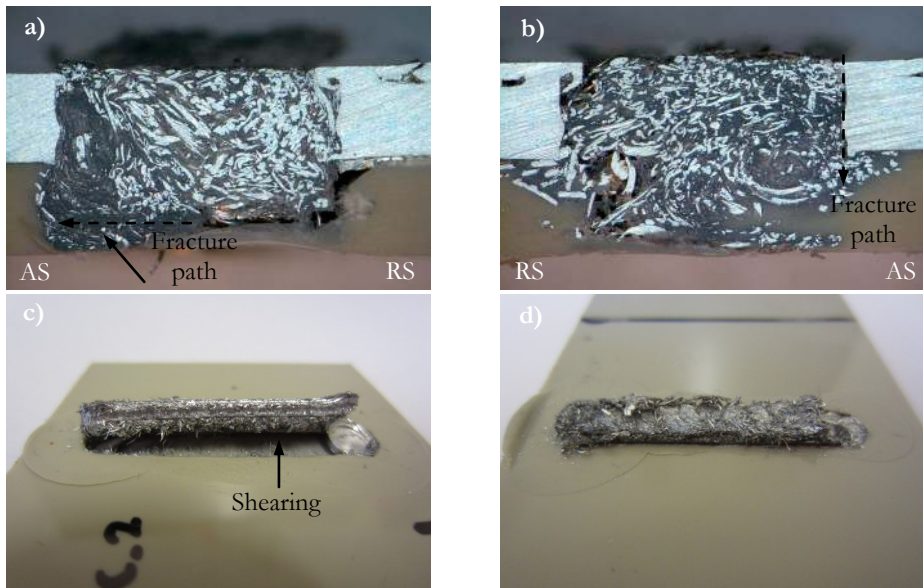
a) AA5754-PP joint cross sections welded with 1800 rpm, 5 cm/min, 0.5°, CW b) AA5754-PP joint cross sections welded with 1800 rpm, 5 cm/min, 0.5°, CCW c) fracture surface of joint in Fig 39a. d) fracture surface of joint in Fig 39b.
